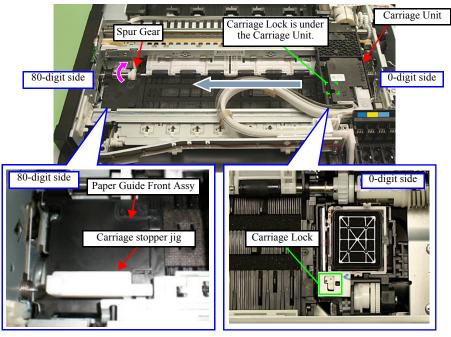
Releasing the Carriage lock and placing the Carriage stopper jig
